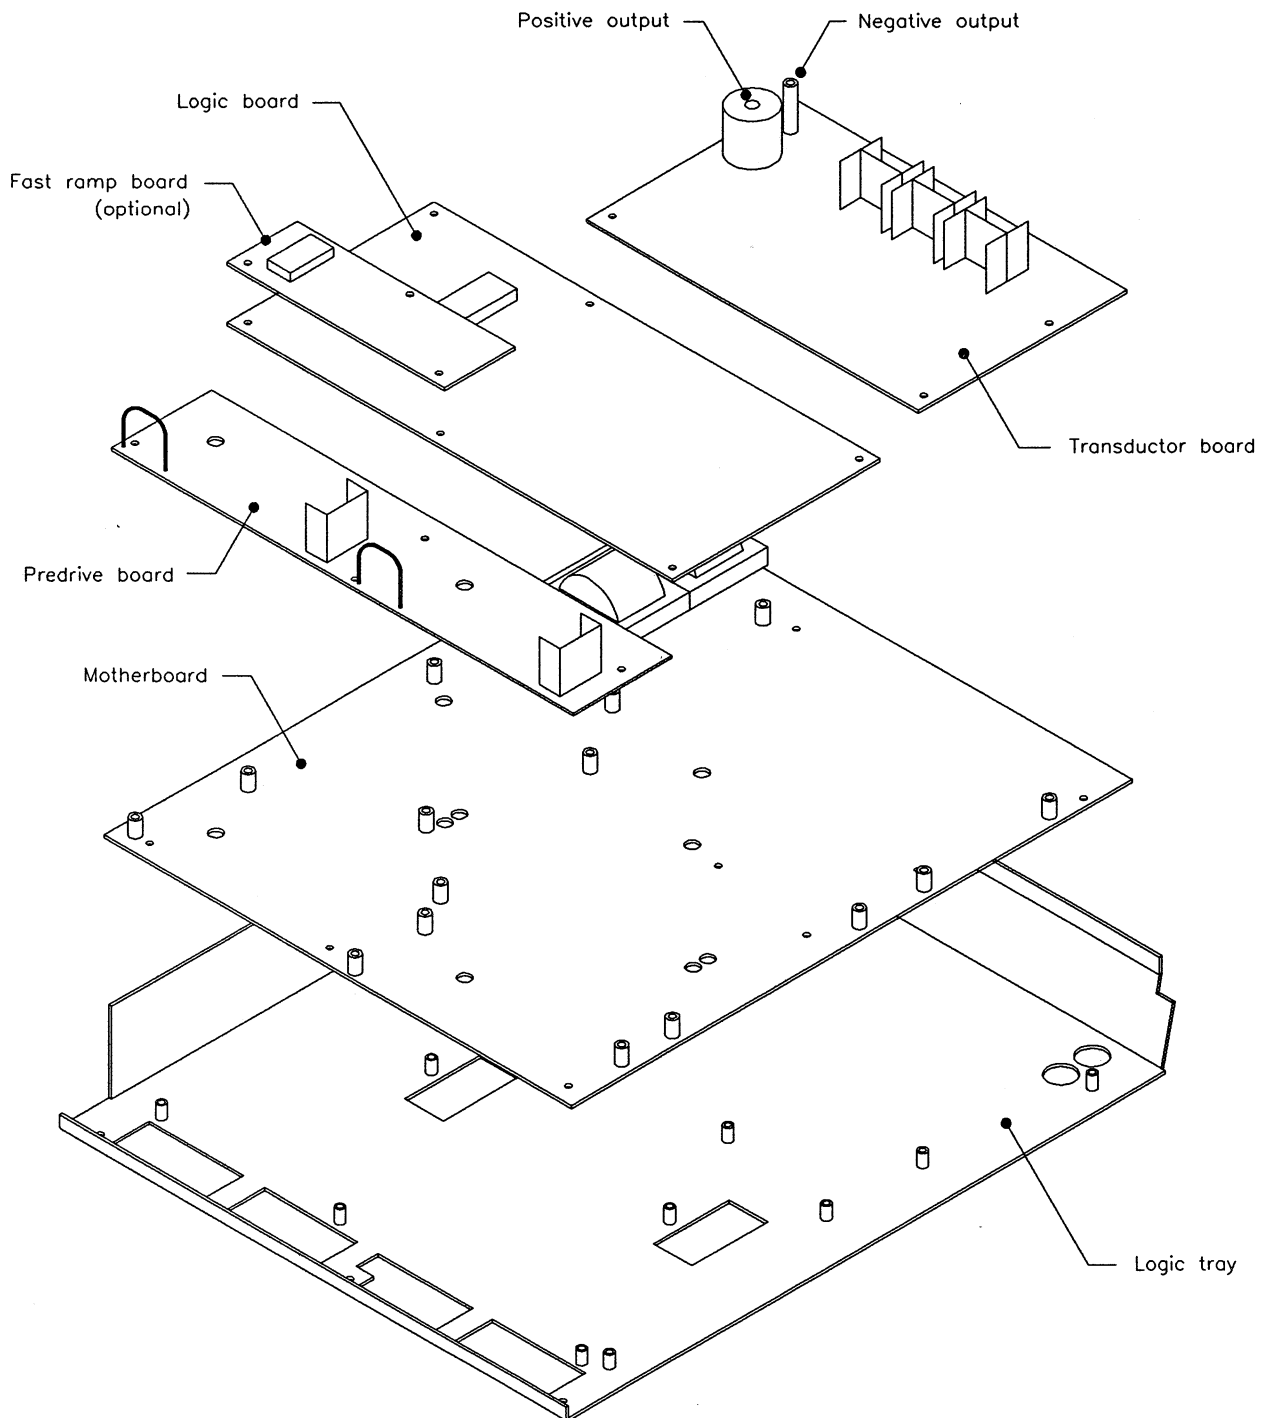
Exploded illustration showing the relative positions of some of the printed circuit boards inside the MDX chassis.
